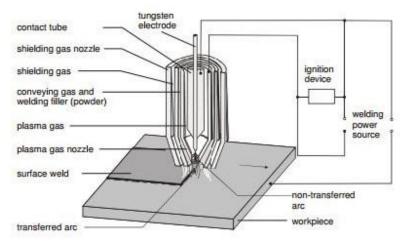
Plasma Arc Welding with Semi – Transferred Arc
